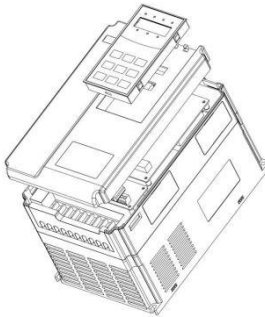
Disassembly drawing of lower cover plate of plastic shell
